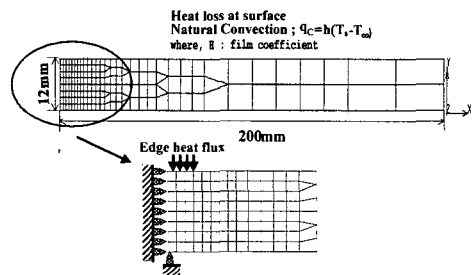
Dimension of weld specimen and analysis zone
